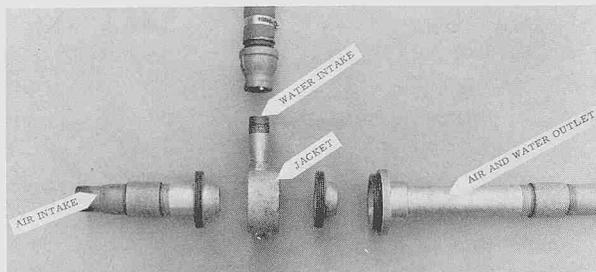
Disassembled cone assembly of hydraulic sampler.
